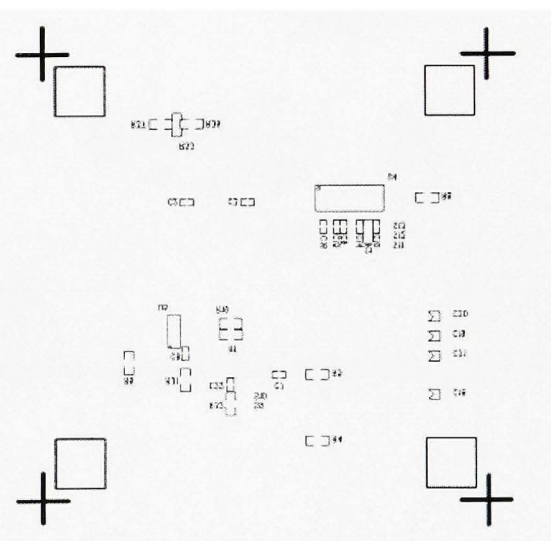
Printed Circuit Board Bottom Side Silkscreen
